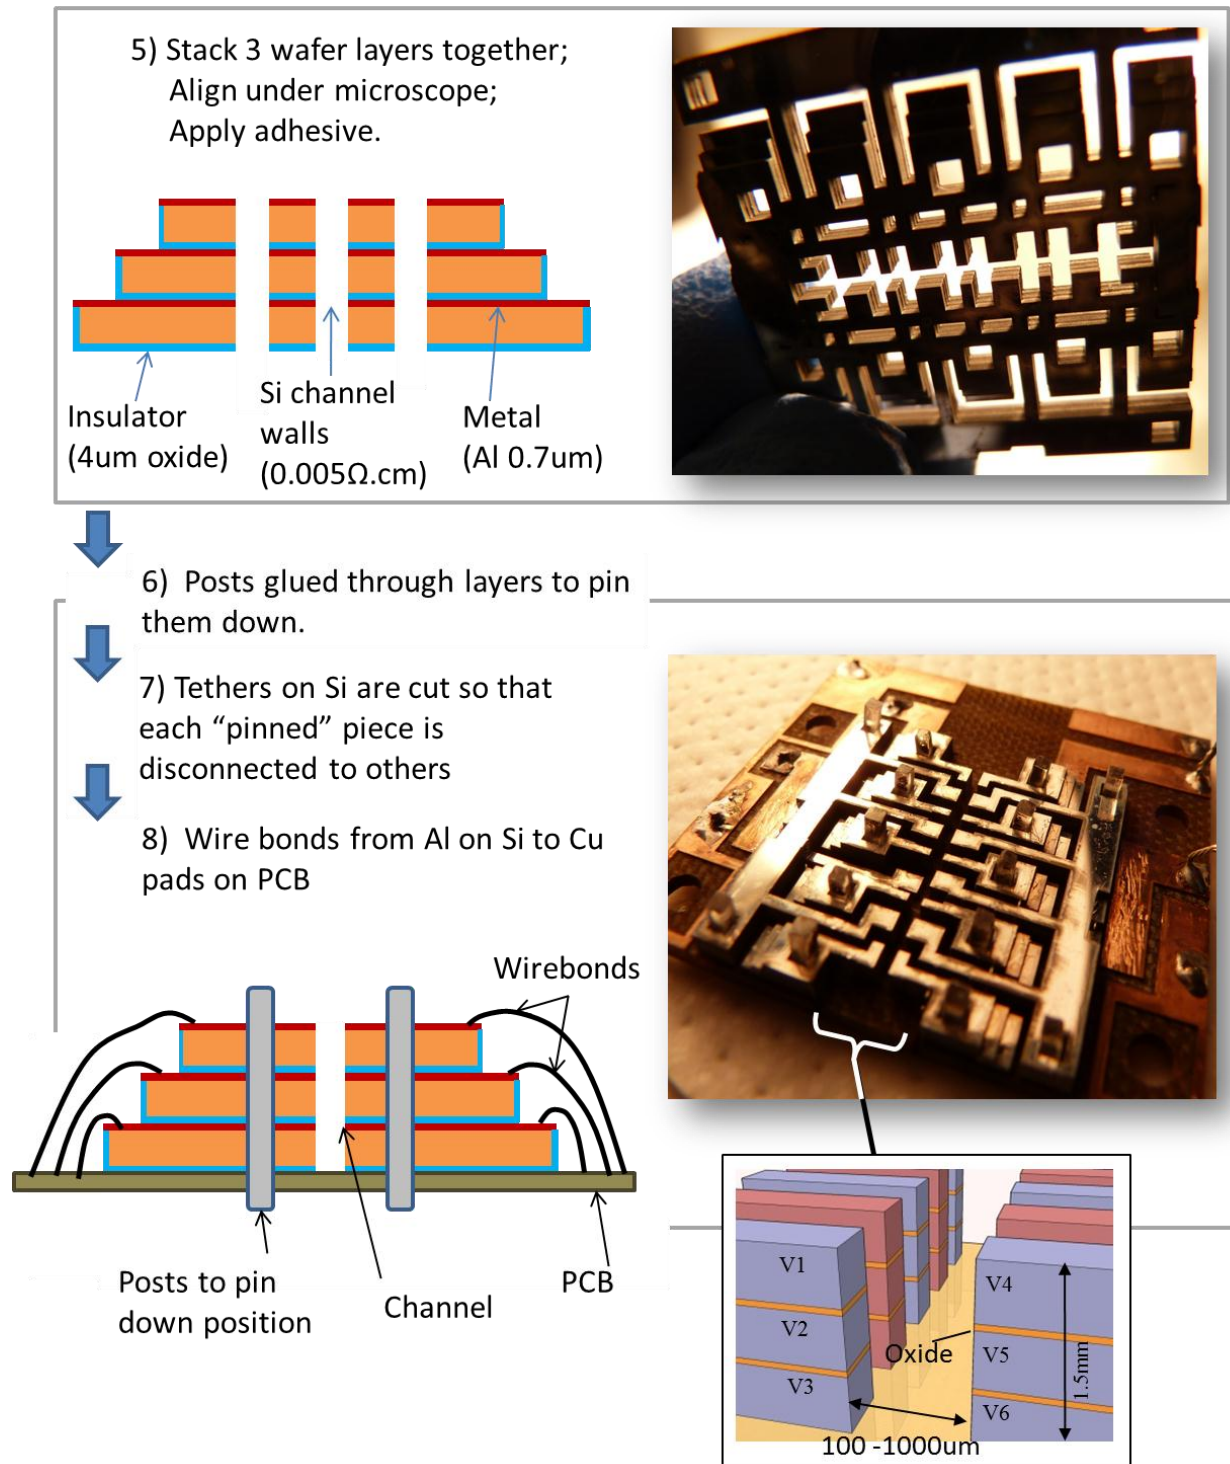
Assembly process of 3 patterned layers, and adhering to PCB.
